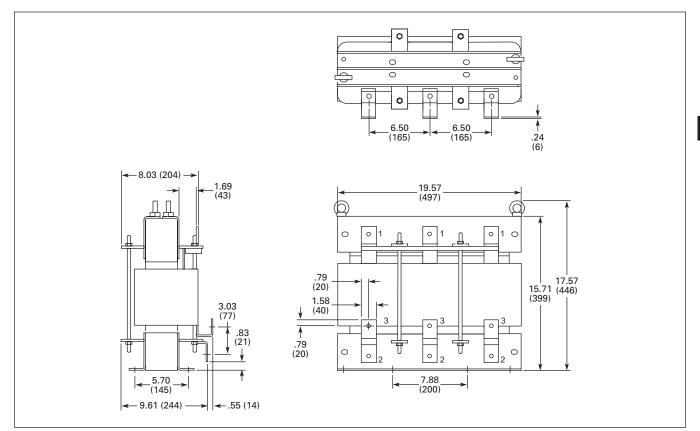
Dimensions of AC Choke CHK0520 in Inches (mm)
